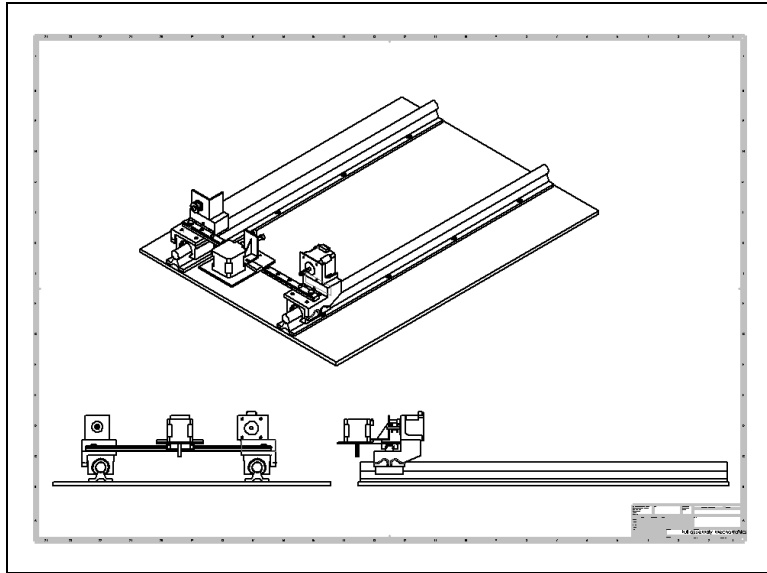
Solidworks Drawing of the board, rails and sliders, custom parts, and some stepper motors. The views (from left to right, top to bottom) are isometric, side, front.
